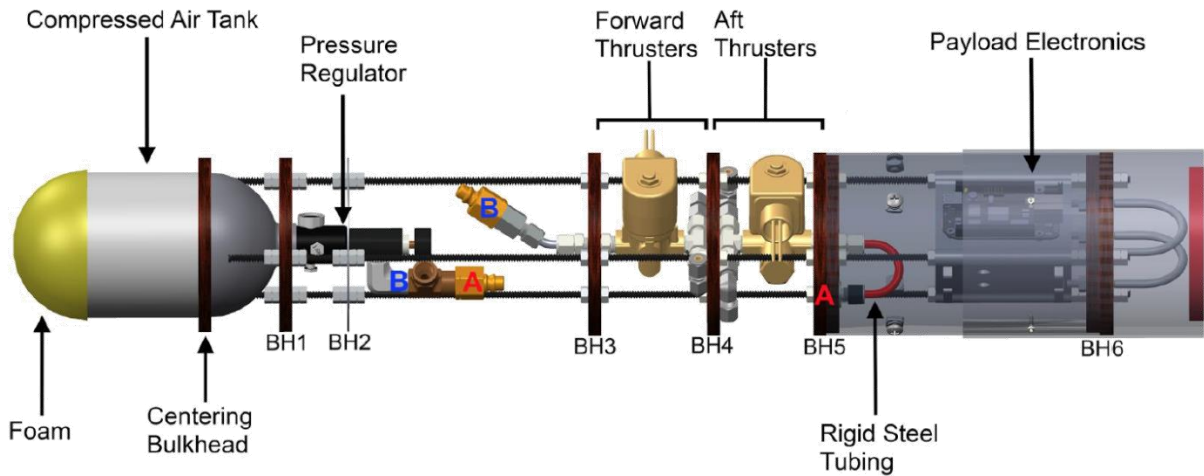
CAD drawing of the Cold Gas Thruster Payload
